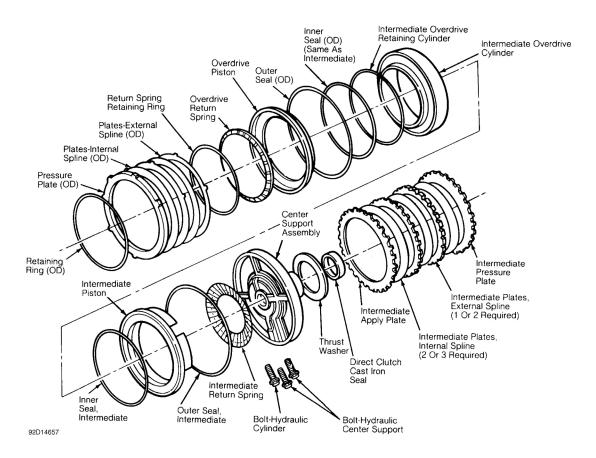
Exploded View Of Intermediate-Overdrive Cylinder Courtesy of FORD MOTOR CO.
